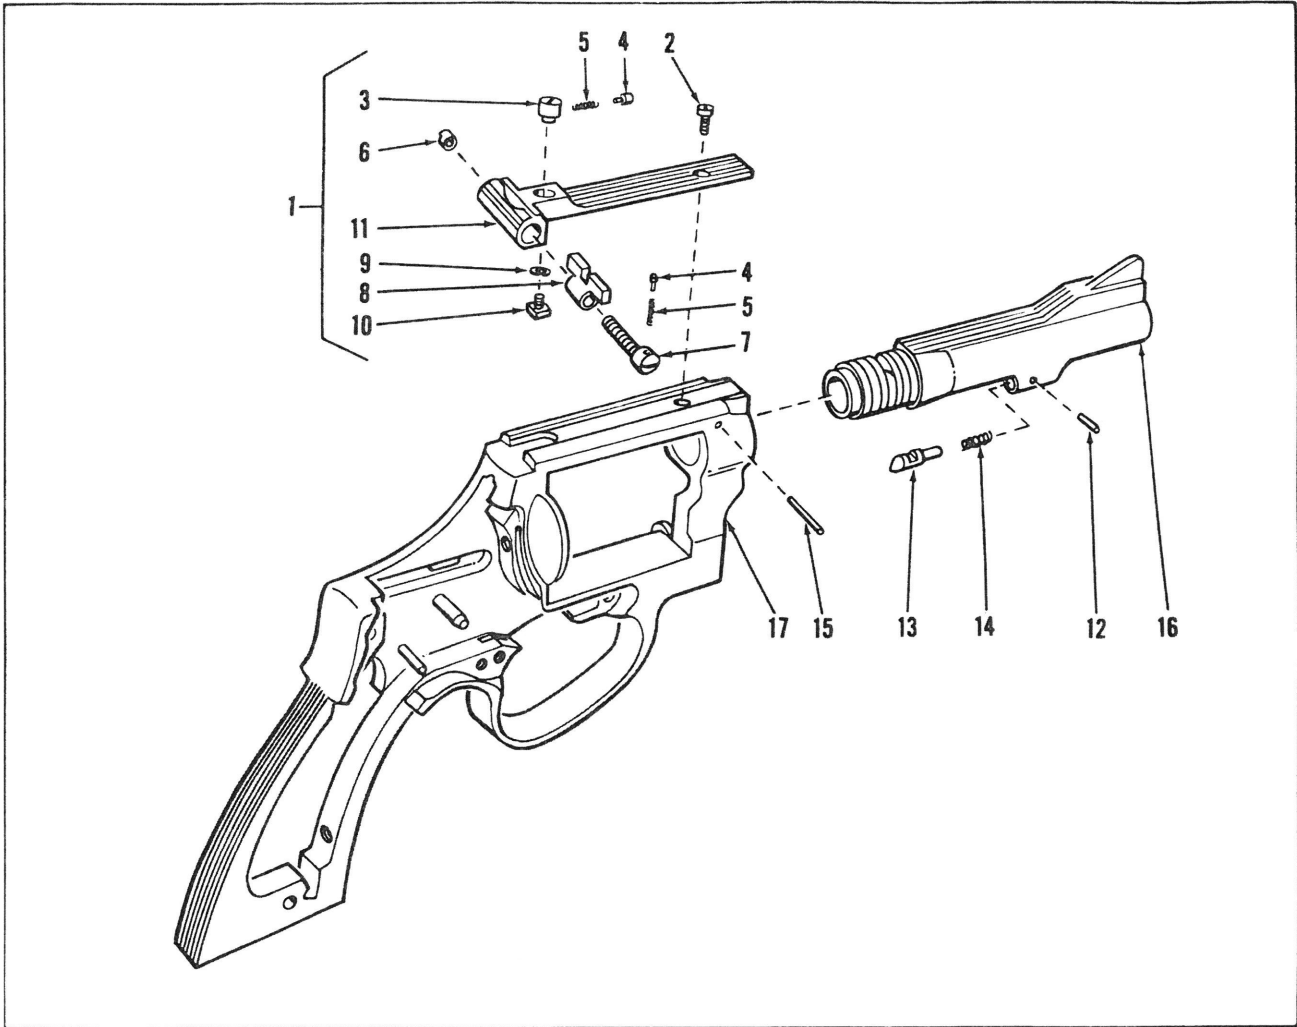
Rear Sight Assembly, Frame Assembly and Barrel Group
